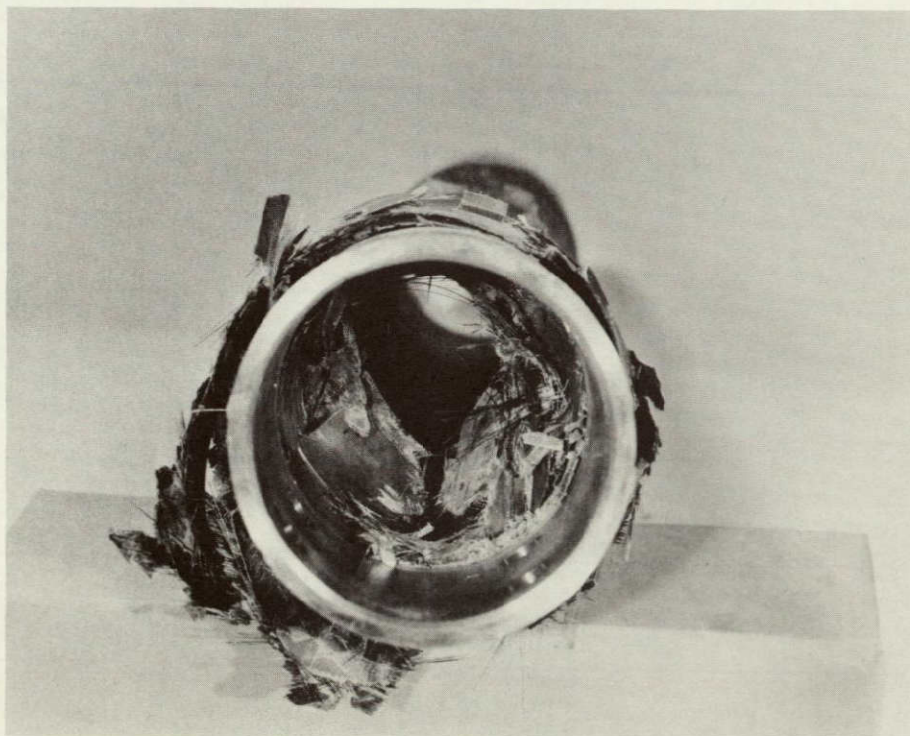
Close-Up of Tube Number 3 Internal Failure
